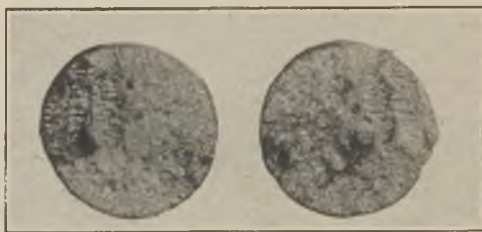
FRACTURED TENSILE TEST PIECE, WITH FLAW SHOWING OUTLINE OF DENDRITES.
